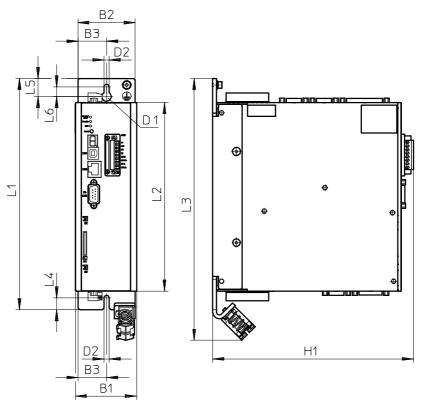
Motor controller CMMP-AS-...-M0: Mounting plate
